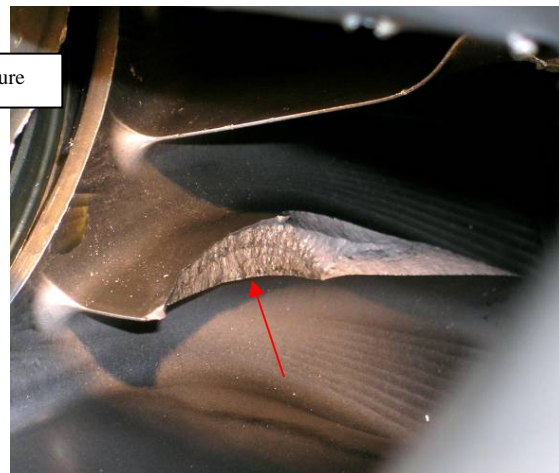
fracture in one compressor blade. The lines in the fatigue fracture are clearly visible.
